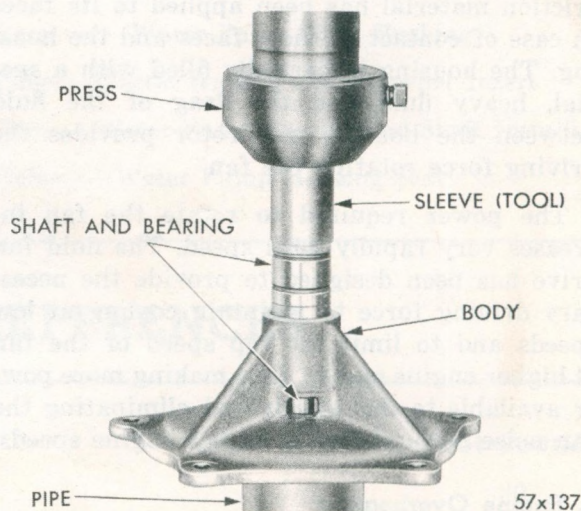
Installing Shaft and Bearing Assembly (Tool C-3468)
